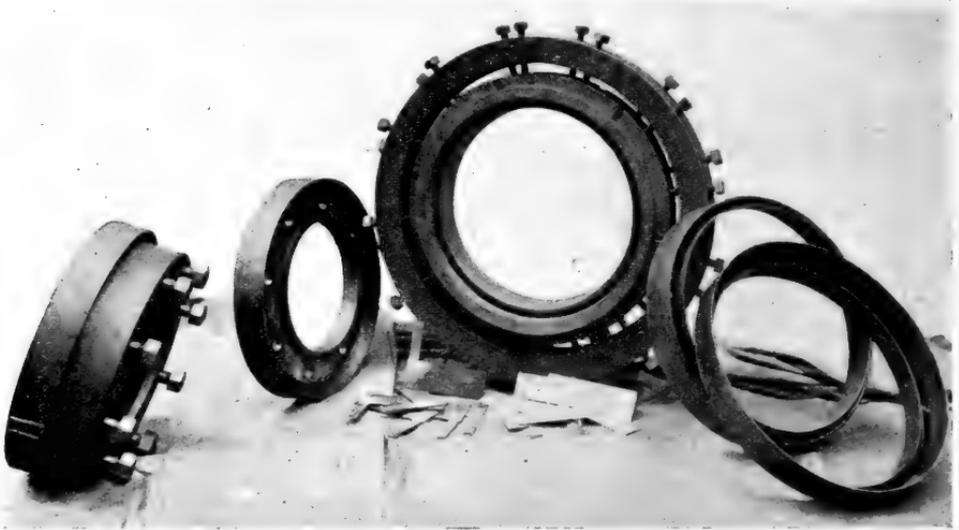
Machined Commutator ready for Bush, showing Building Rings and parts.
